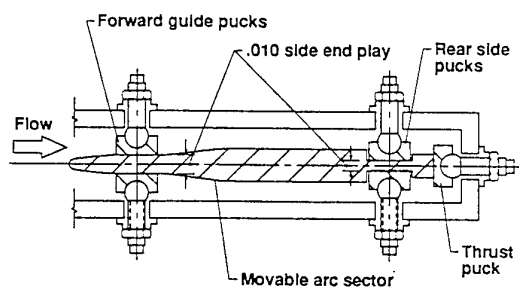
Cross section of movable arc sector illustrating guide pucks.
